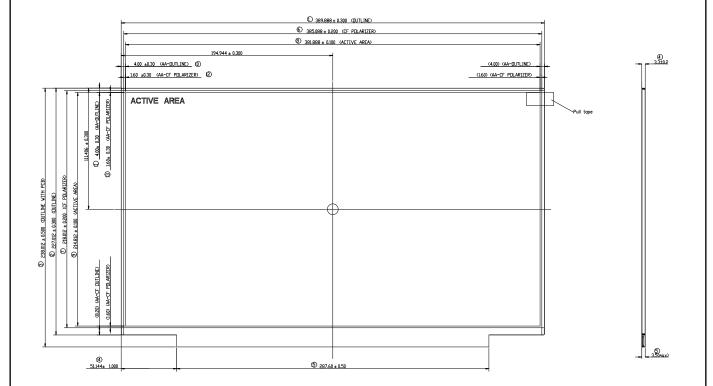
TFT-LCD Module Outline Dimension (Front View)
